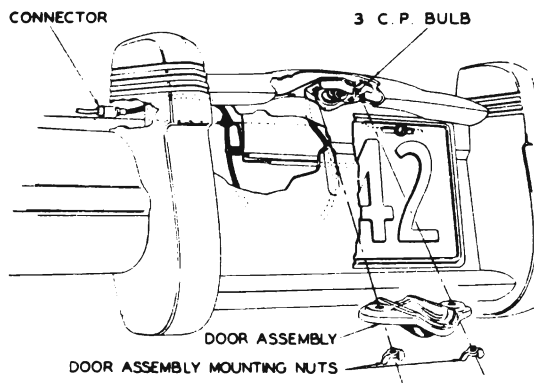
Rear License Plate Bracket—Series 50-70
